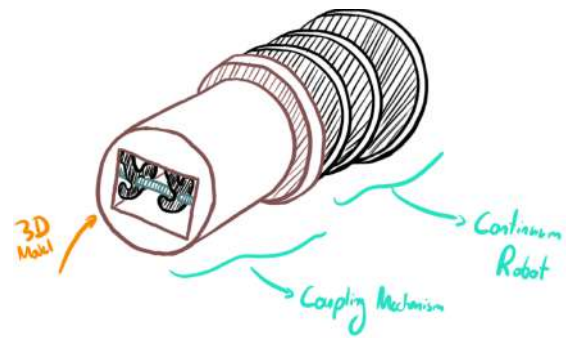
Continuum Disk Mag-lock Isometric View Sketch.
